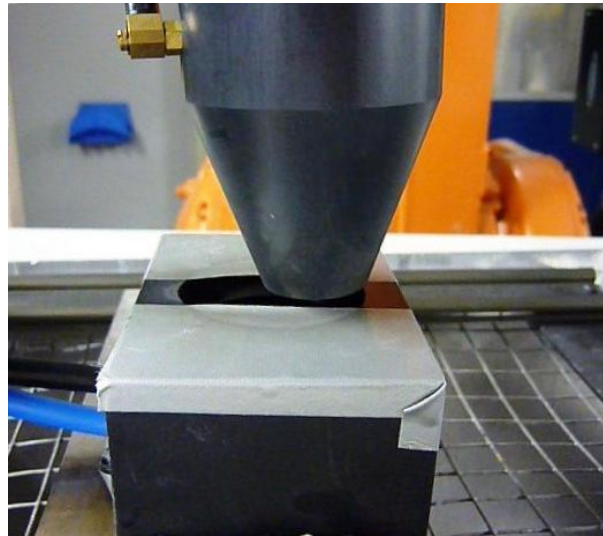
Welding of similar NiTi joints for parameters evaluation
